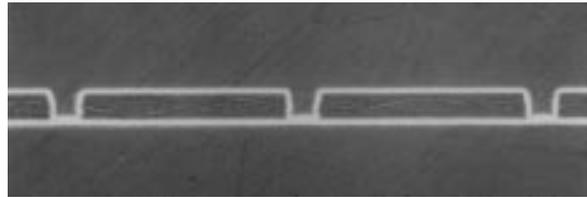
Blind via hole processing of a glass-epoxy PCB.
